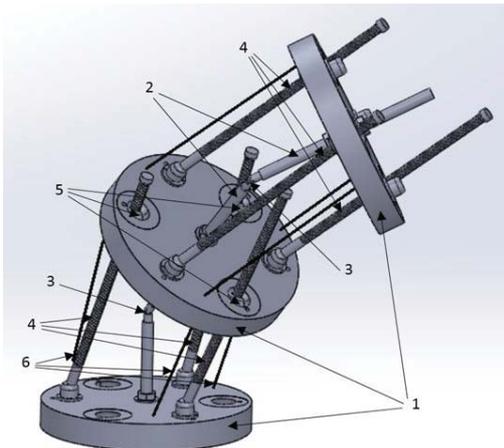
External appearance of two sections of a flexible manipulator: 1- Base of sections; 2-Central axis; 3- Cardan mechanisms; 4-Fixing rods; 5-Holders; 6- Control cables.
